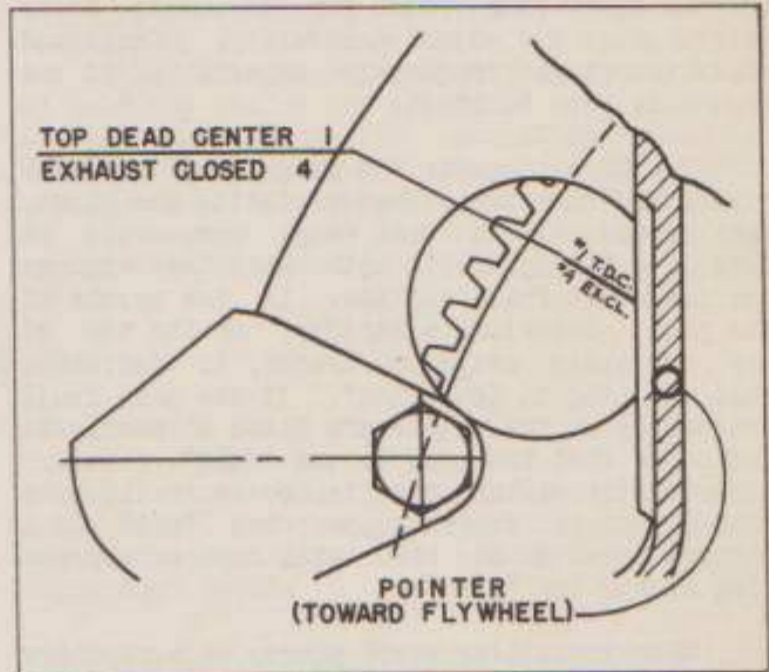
FLYWHEEL TIMING MARKS
